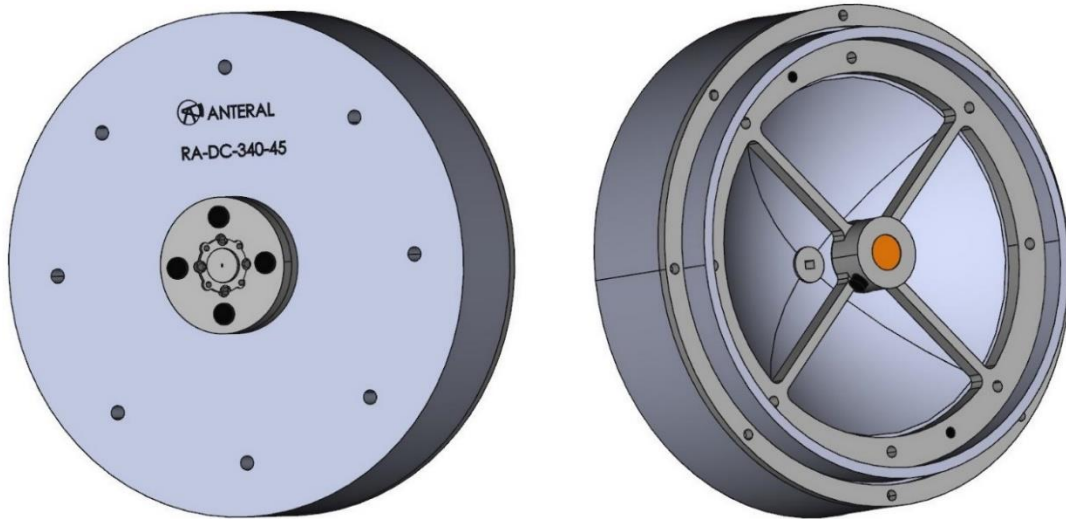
Bottom and Top View of the Final 3D Mechanical Model
